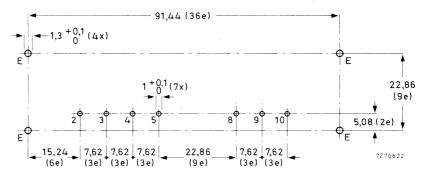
Piercing diagram viewed from solder side of board; e = 2,54 mm (0,1 in)
